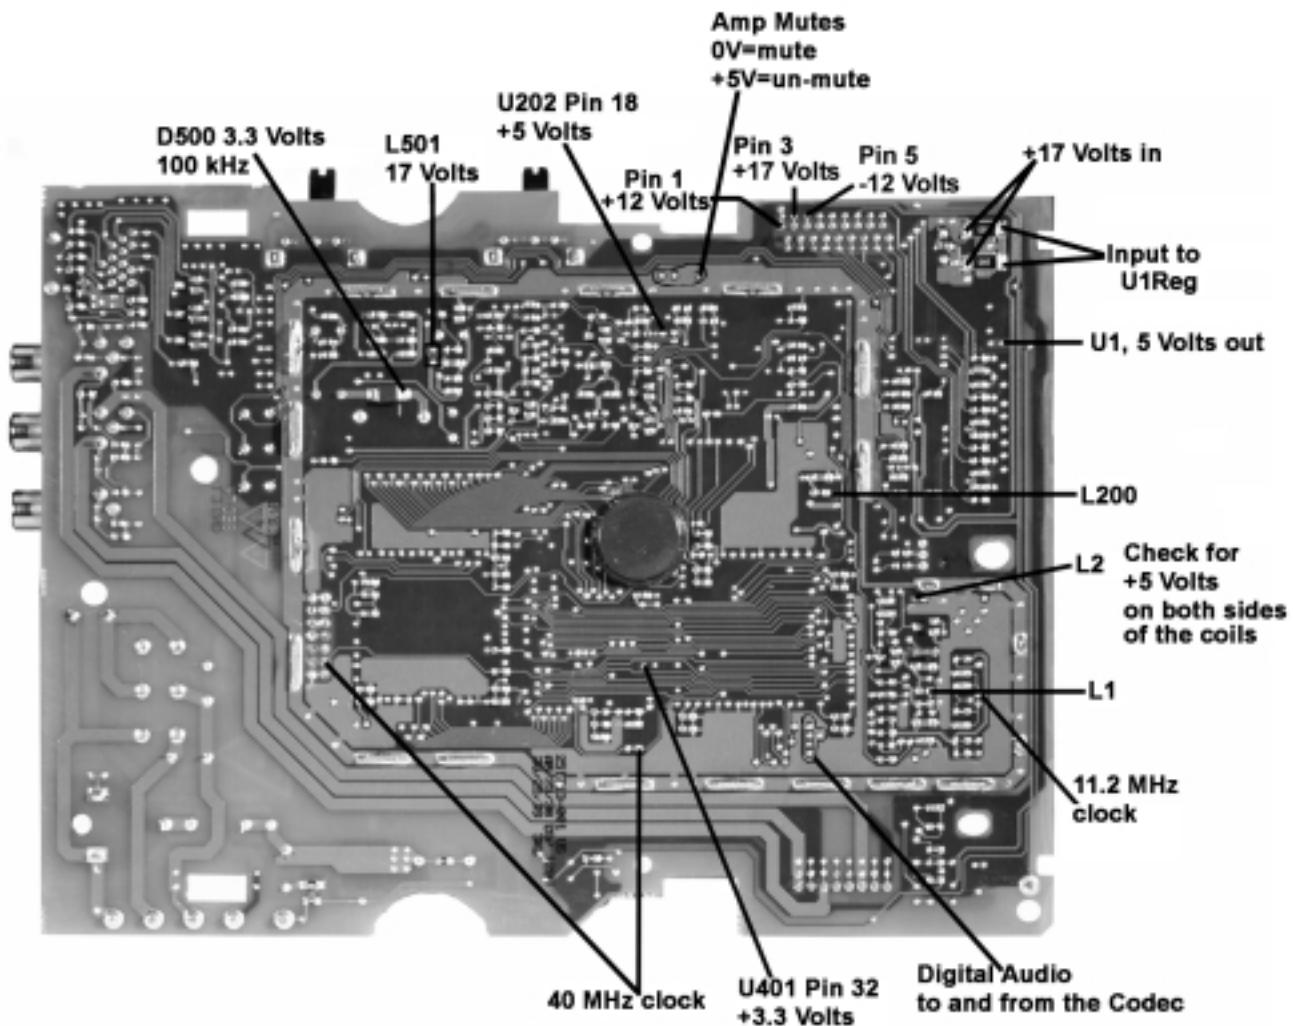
DSP PCB Test Point Locations Layout Diagram, Solder Side
